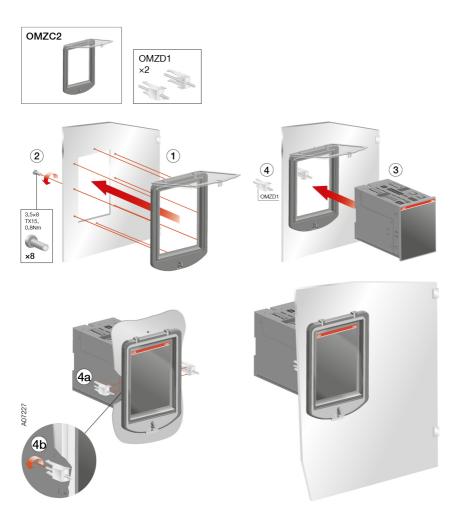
Automatic control unit OMD800, door mounting with the cover plate, door drilling for the cover plate OMZC2, see Accessories, Section 10
